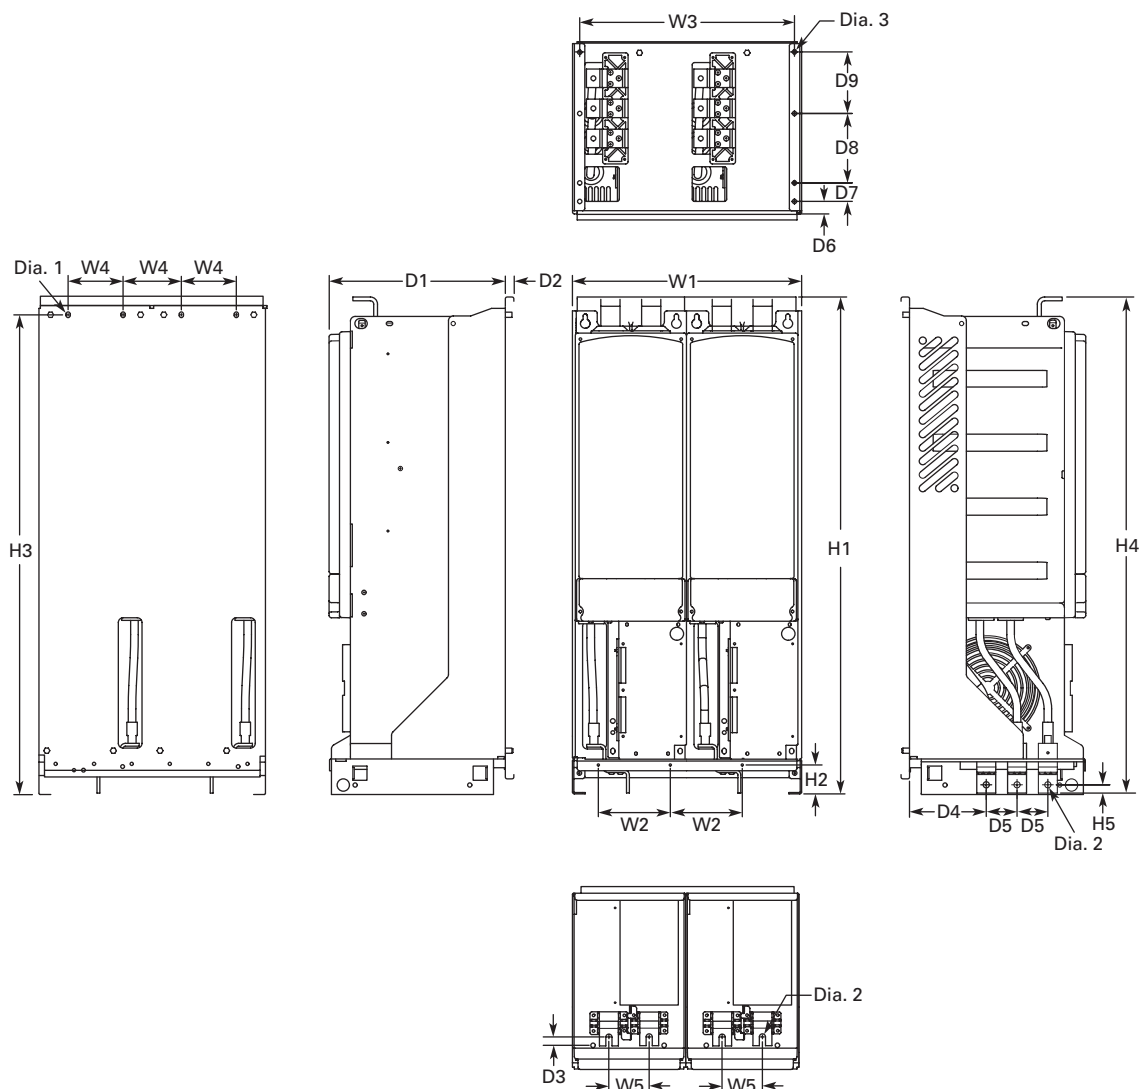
9000X Dimensions, FR13 Open Chassis Converter
